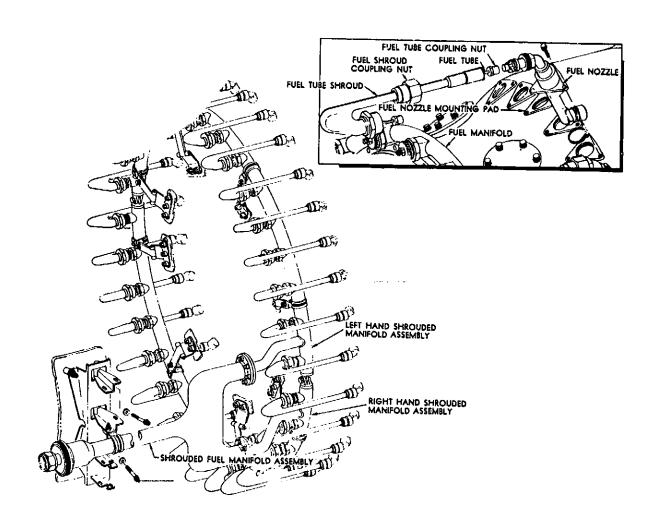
CF6-50 Engine Fuel Manifold Assembly.
